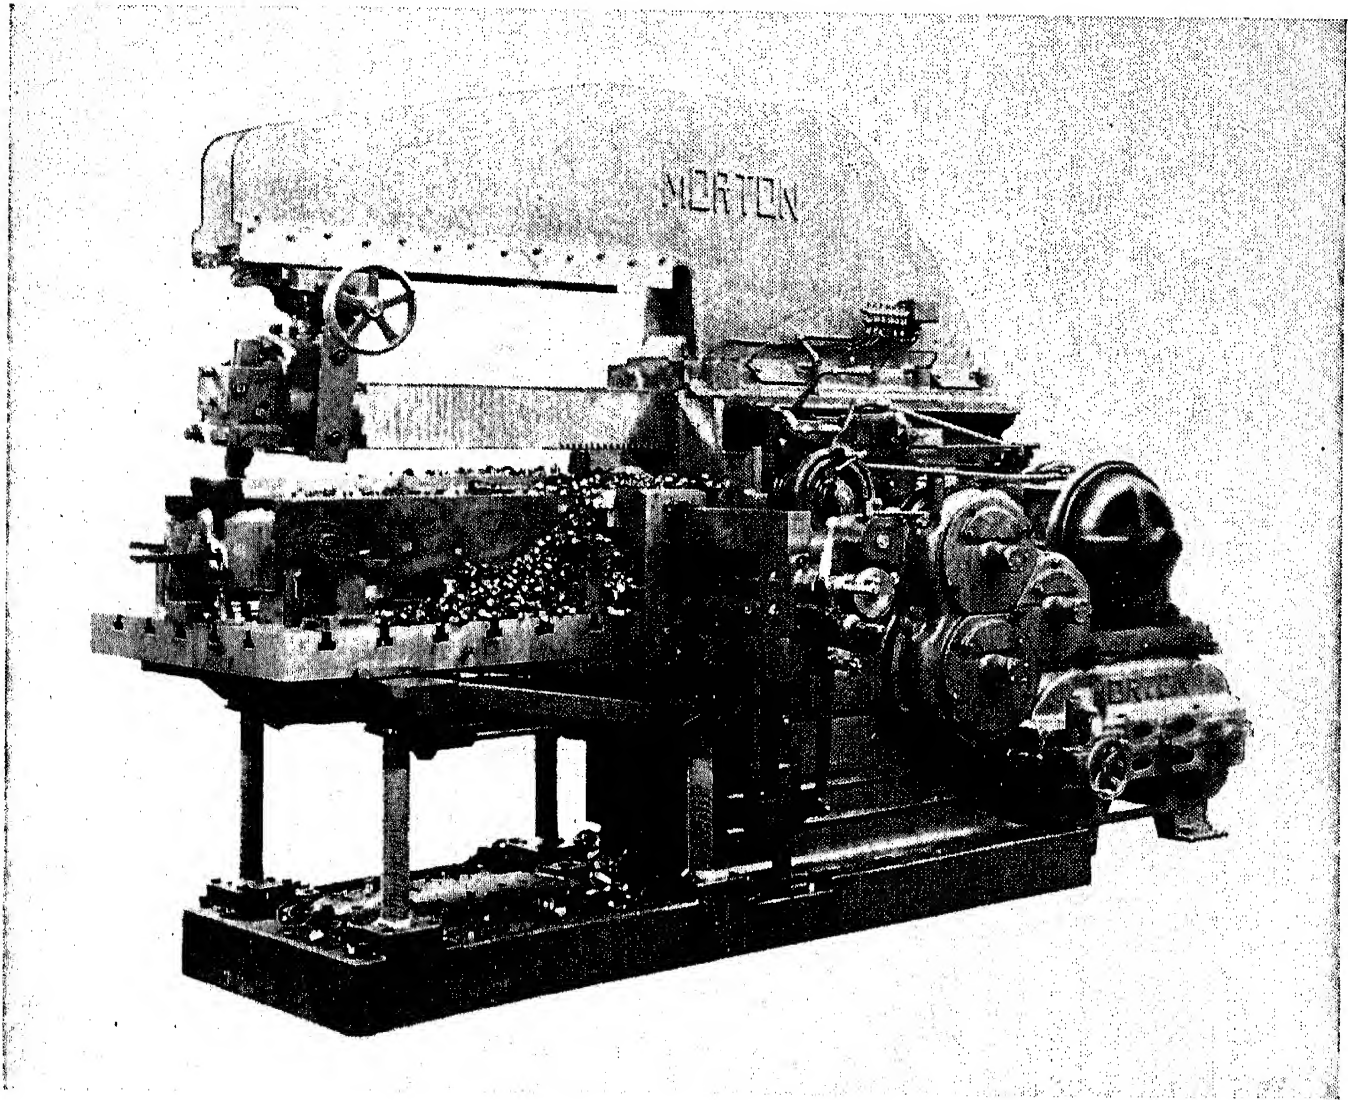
A 42 in. heavy duty draw cut shaper machining a 20 in. by 35 in. by 12 in. die block. (Courtesy Morton Manufacturing Co.)
